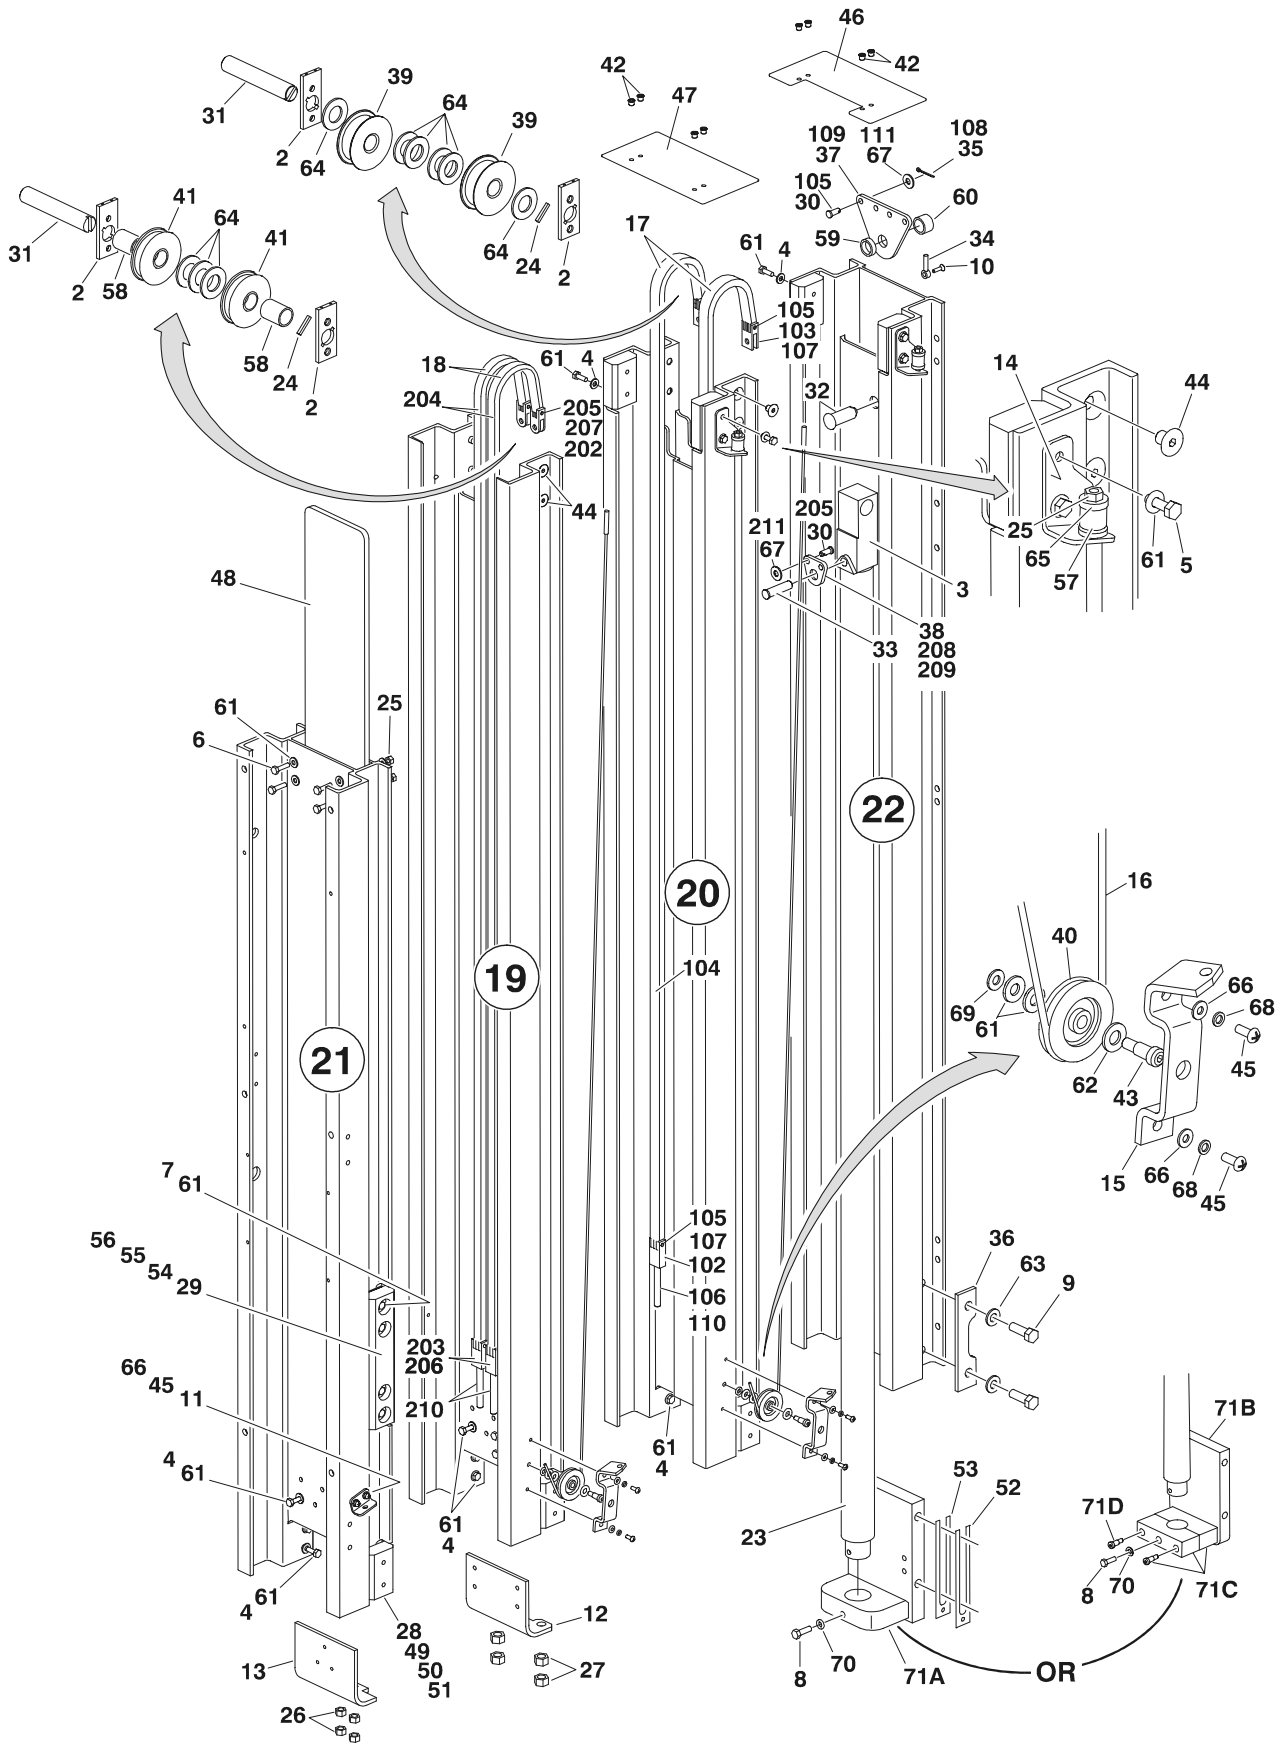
MAST ASSEMBLY - 12ELSP
